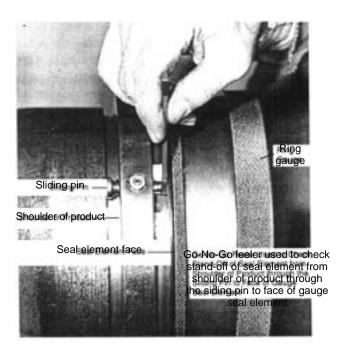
Extreme-Line Thread Ring Gauge Installed Hand-Tight and Seal Ring Advanced. (Go-No-Go in Place for Measuring Seal Diameter)
